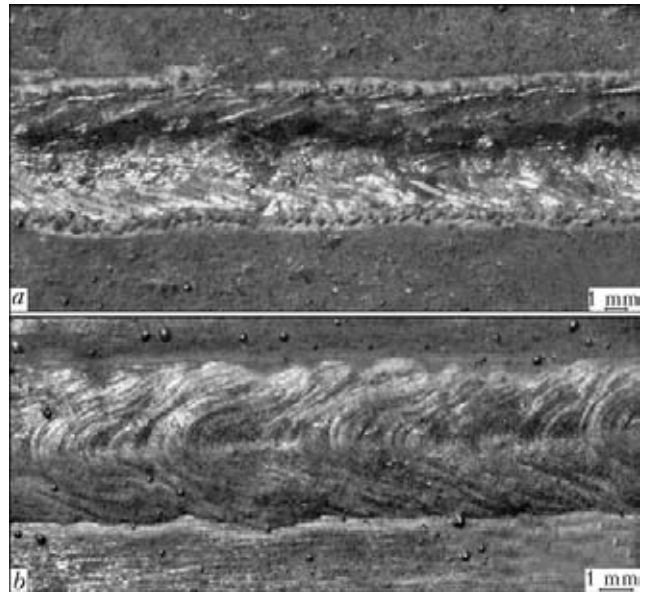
Appearance of surface of the butt joint from alloyed steel after laser welding without (a) and with (b) melting of filler wire
